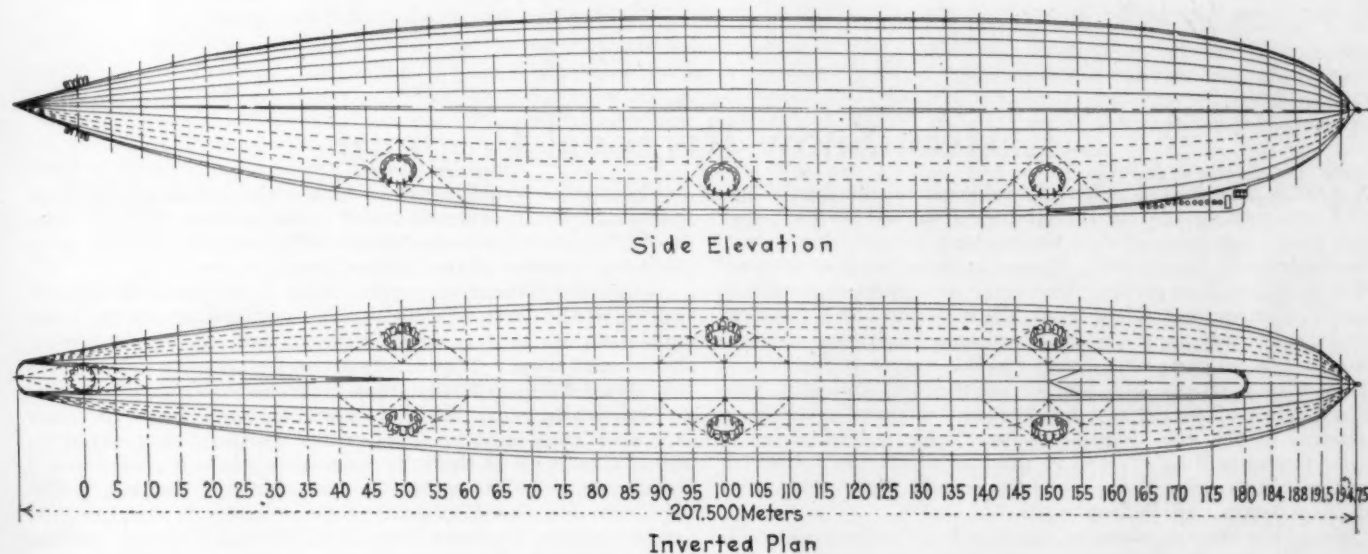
LONGITUDINAL PLAN AND ELEVATION OF ROTOR-DISC-PROPELLER INSTALLATIONS ON A DIRIGIBLE
